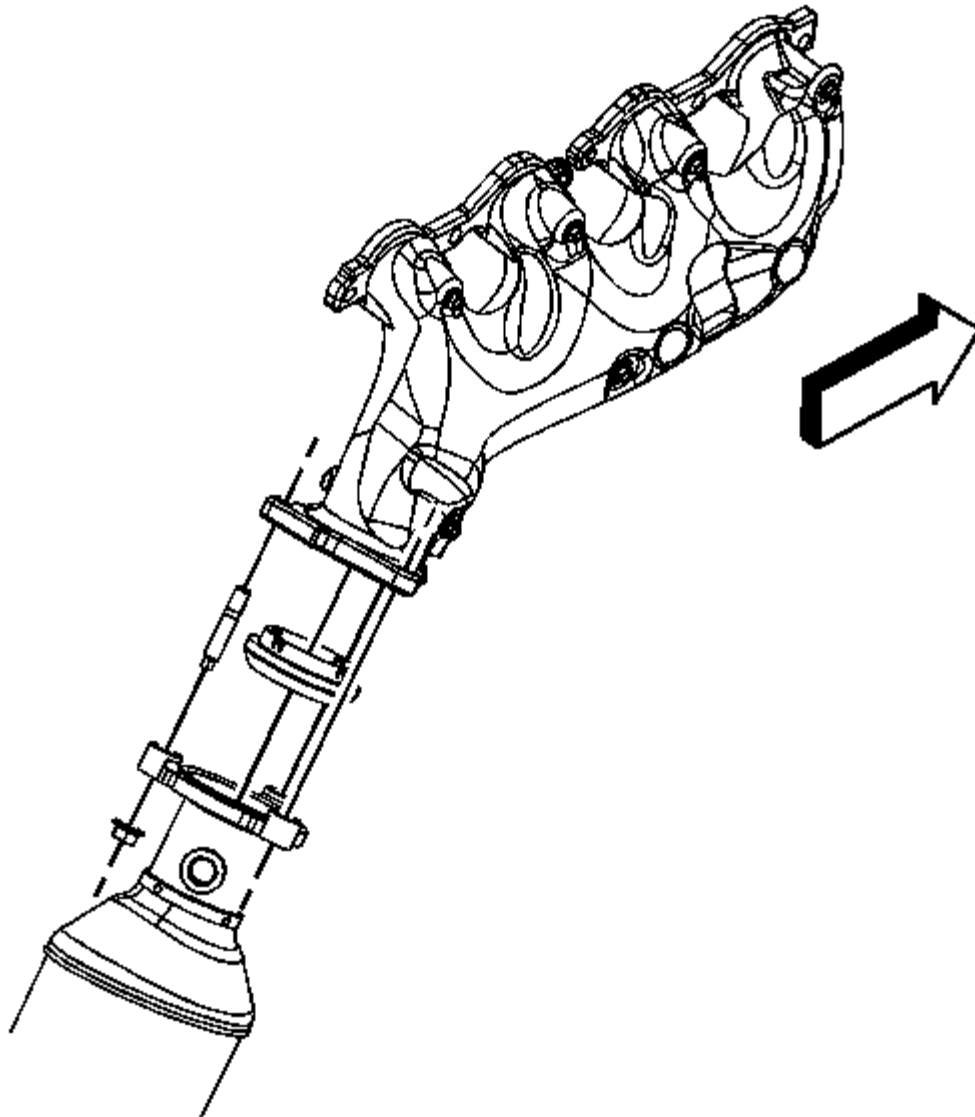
View Of Exhaust Manifold, Gasket & Catalytic Converter
